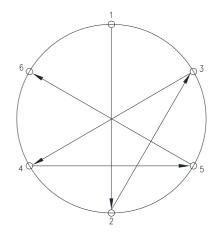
Criss-cross Pattern for Bolted Assemblies
